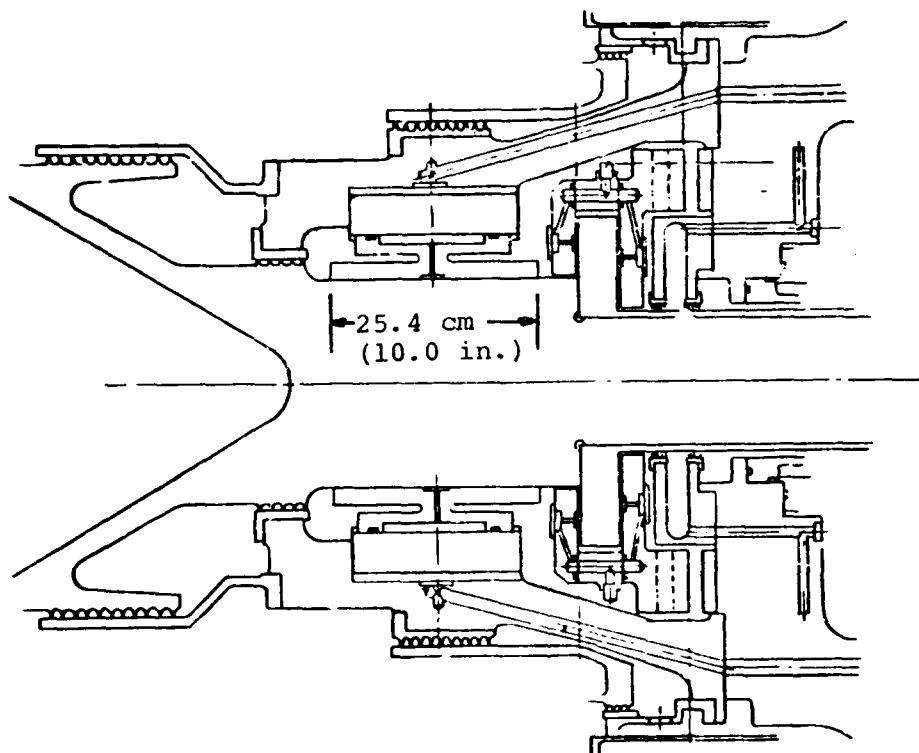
3600 RPM Power Turbine Rear Journal and Thrust Bearing
